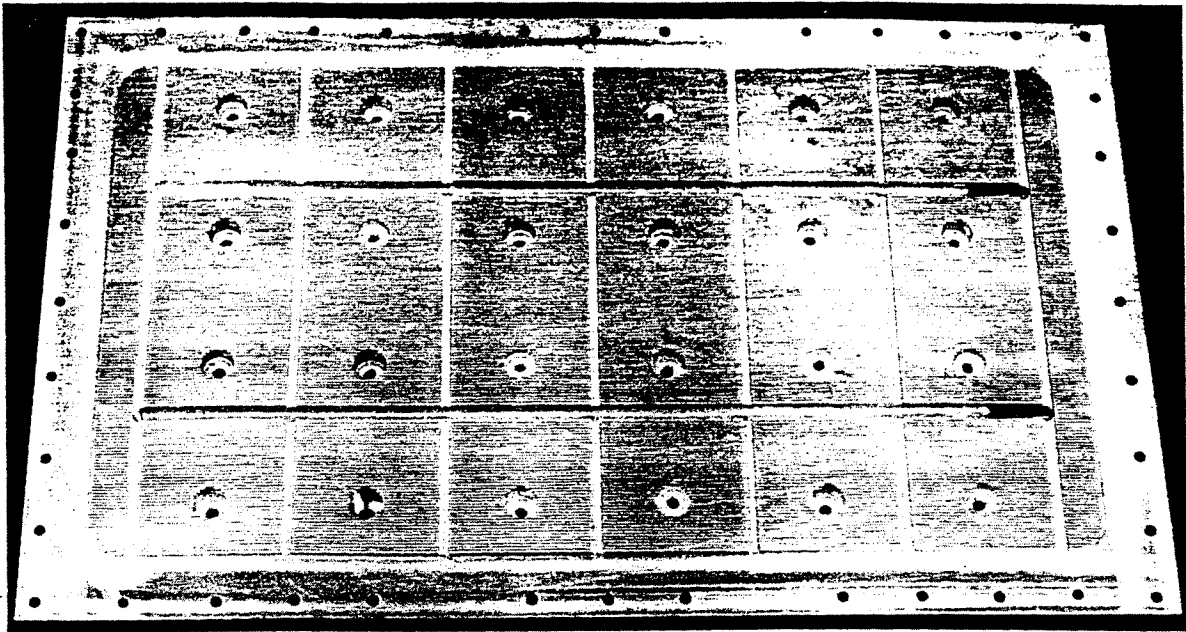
Cover plate of capillary pump tested with R11: view on grooved heat transfer area milled at bottom side
